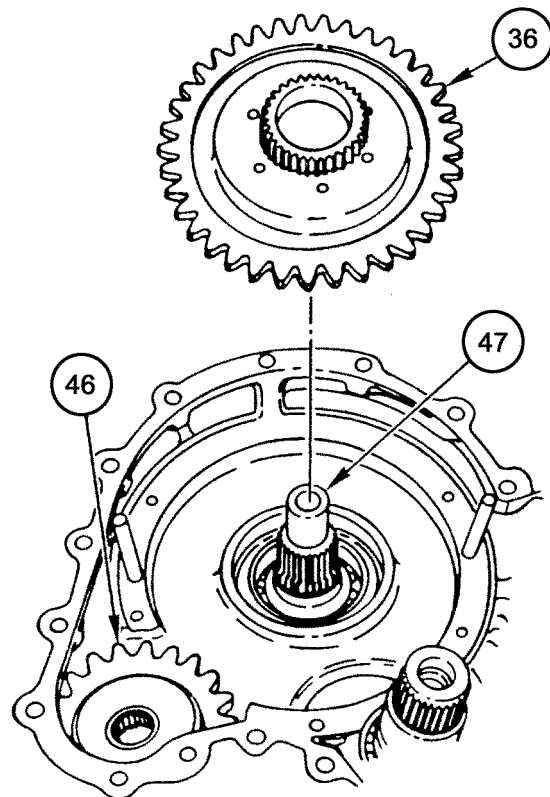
Left Steer Gear and Output Sun Gears. (Repeated)
